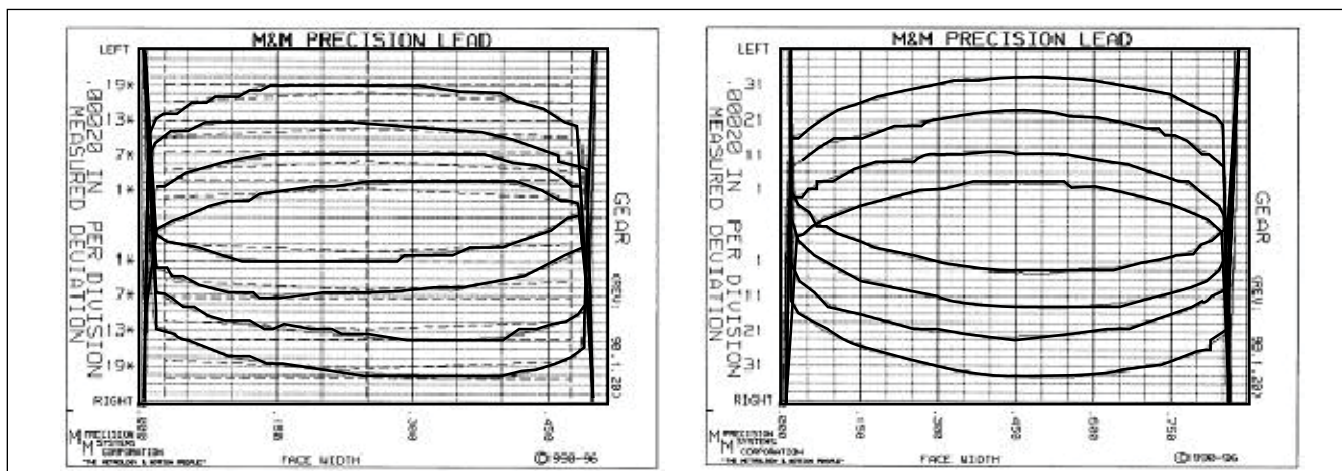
Lead charts: baseline gear (left) and mate gear (right).
